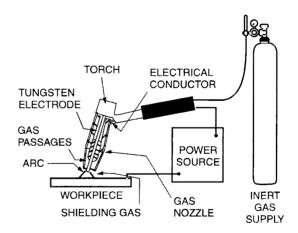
Gas Tungsten Arc Welding Equipment
